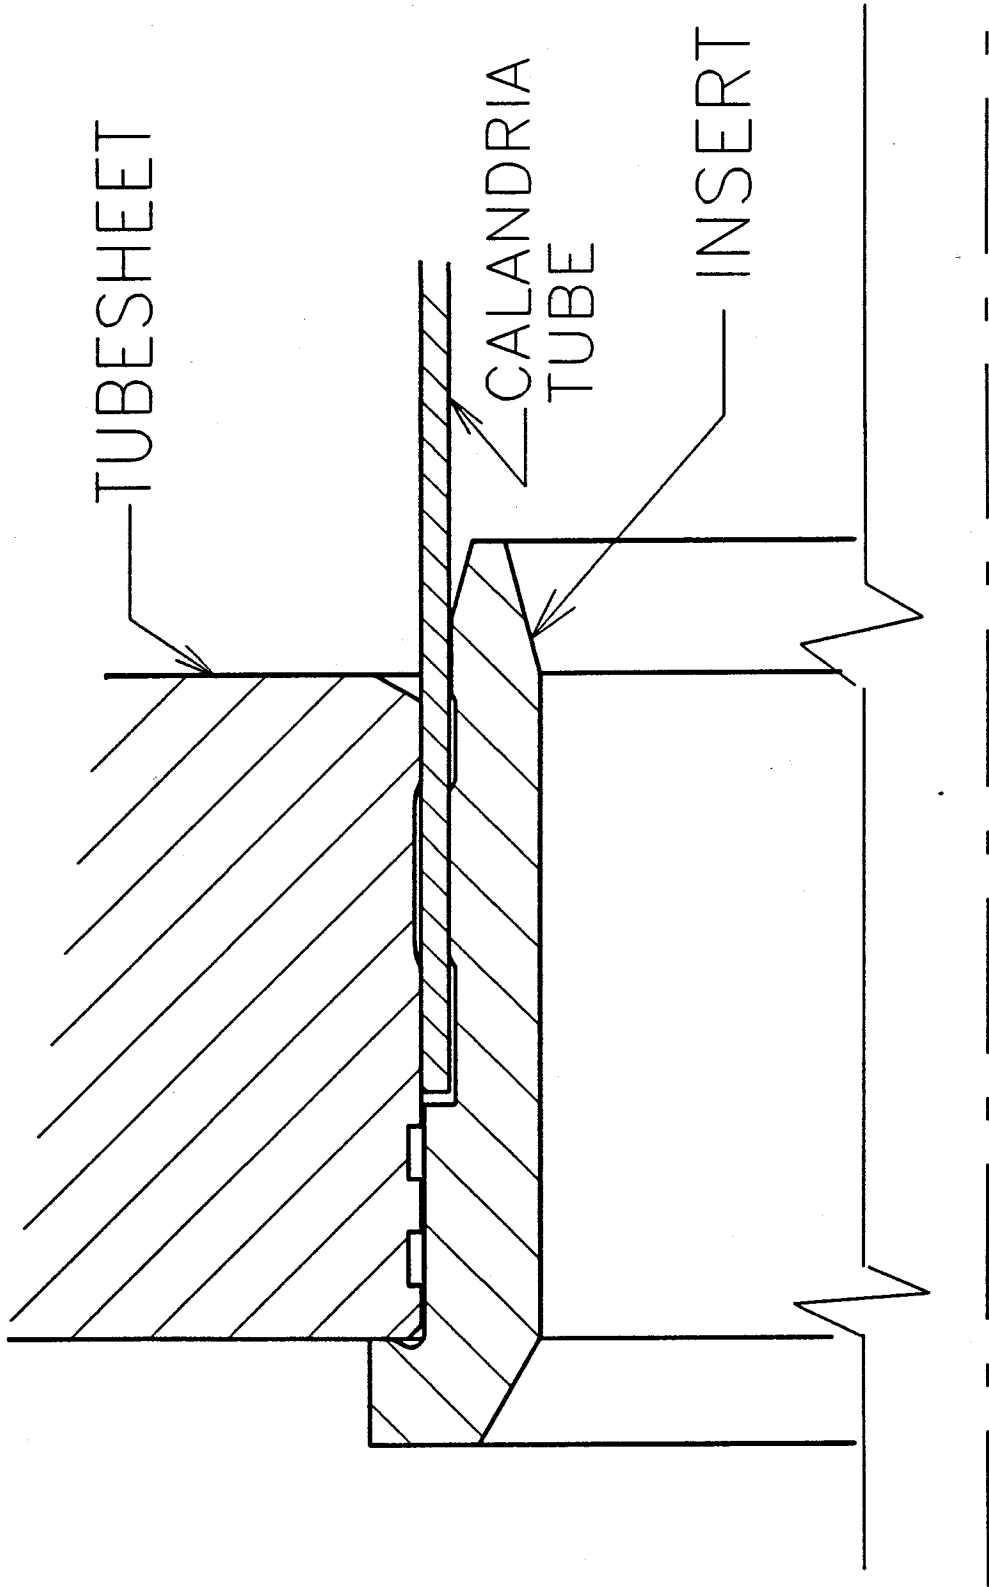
Calandria Tube-to-Tubesheet Joint - Assembly before Roll-Expansion
